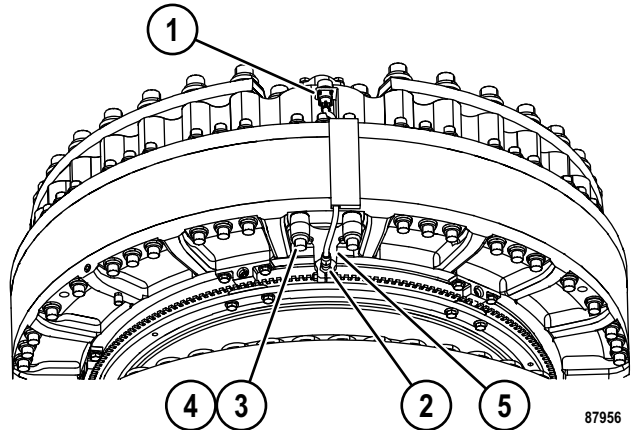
WHEEL SPEED SENSOR REMOVAL
